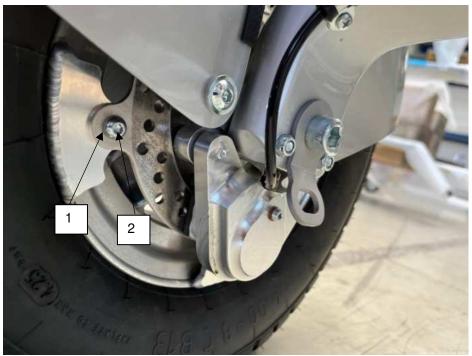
M6 x 12 Screw and serrated wash holding the brake disc on the rim
